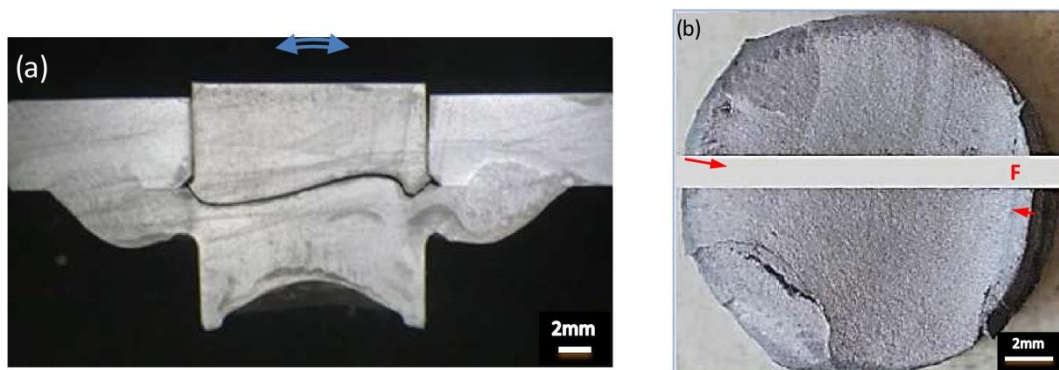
Sectional macrograph (a) and optical fractograph in bottom view (b) of the full-circled sample
